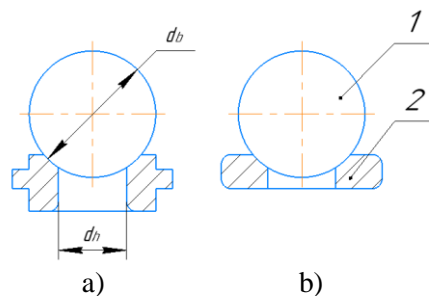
Ball-seat valve pair: 1 – ball; 2 – seat; a – valve with a collar (VC); b – valve with a cylindrical seat (V)
